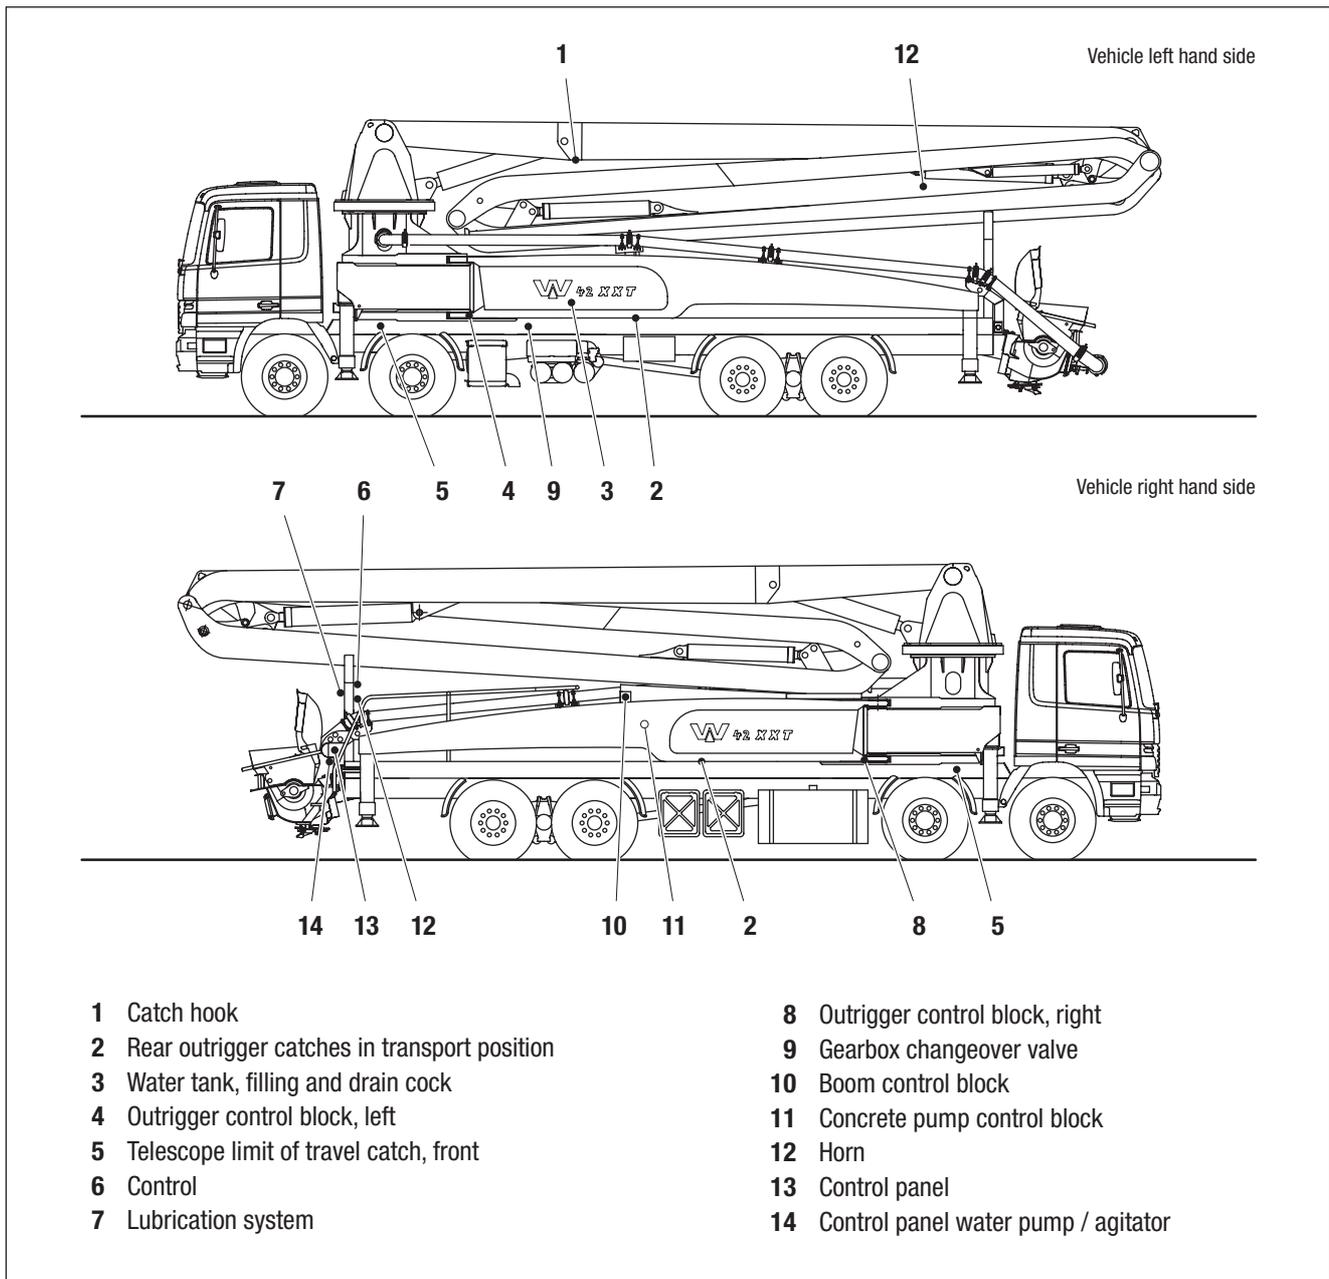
Main components of the truck-mounted concrete pump - sheet 1
